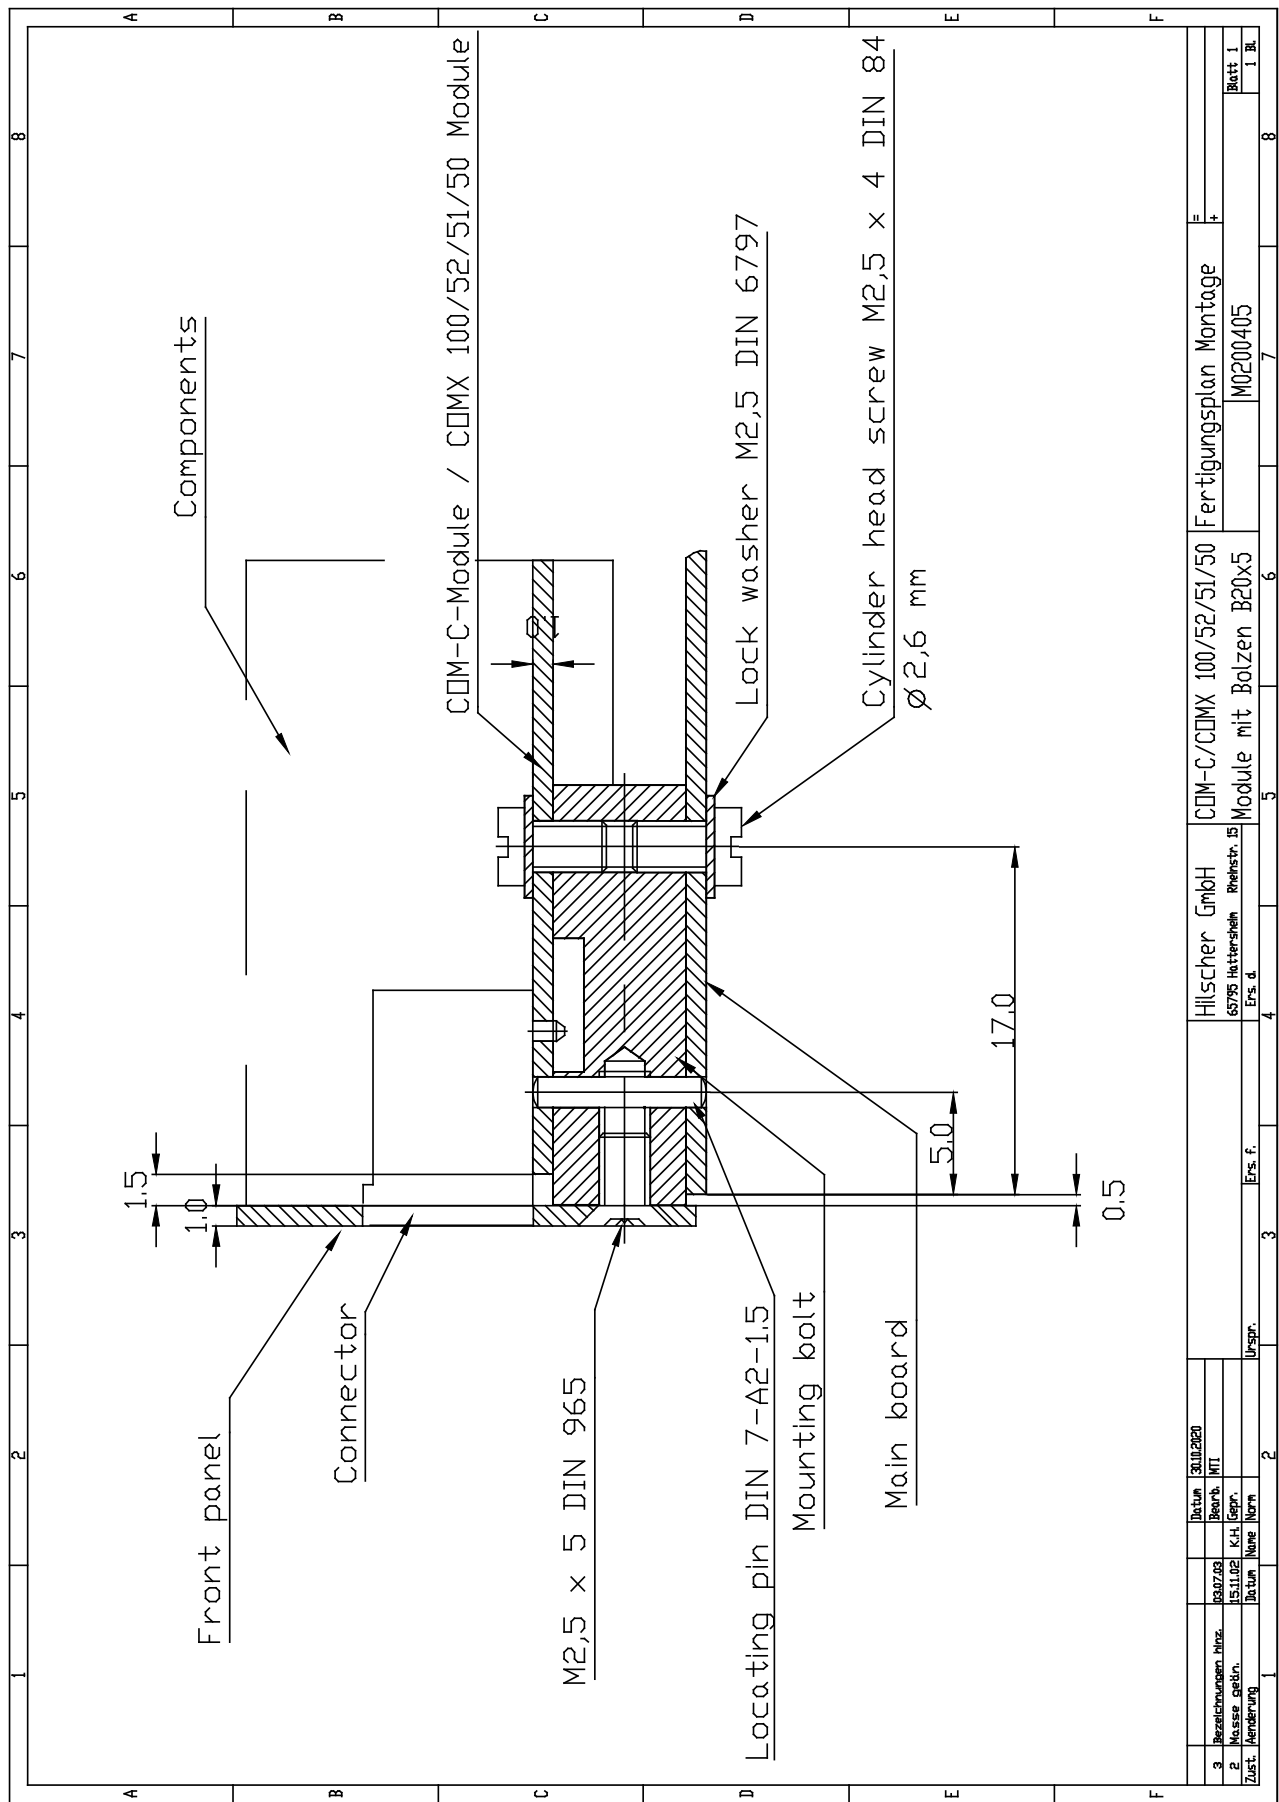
Mechanical dimension of Bolt COM-CA-B24X5
